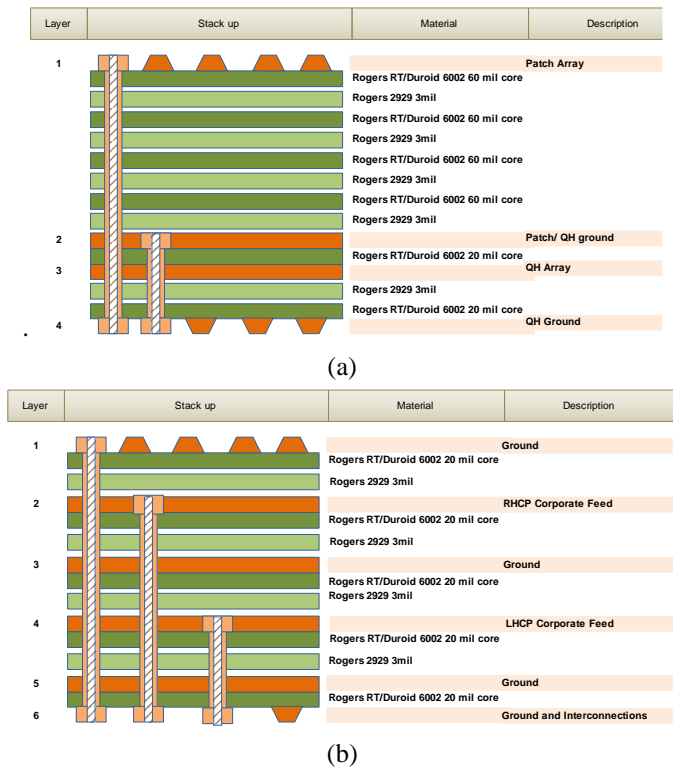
PCB stack-ups (a) PCB1 and (b) PCB2
